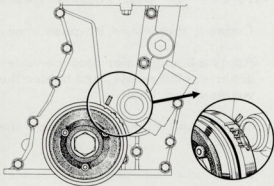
Crankshaft Timing Mark Adjustment Y5188
